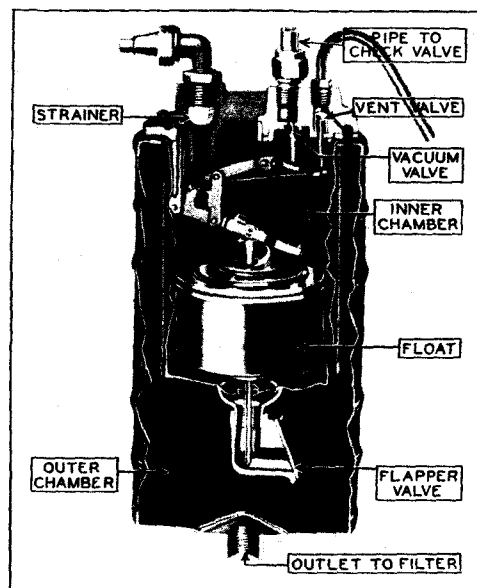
Sectional view of vacuum tank. There is a check valve in the connection to the intake header which prevents back-flow when the vacuum of the header is less than that of the pump.
